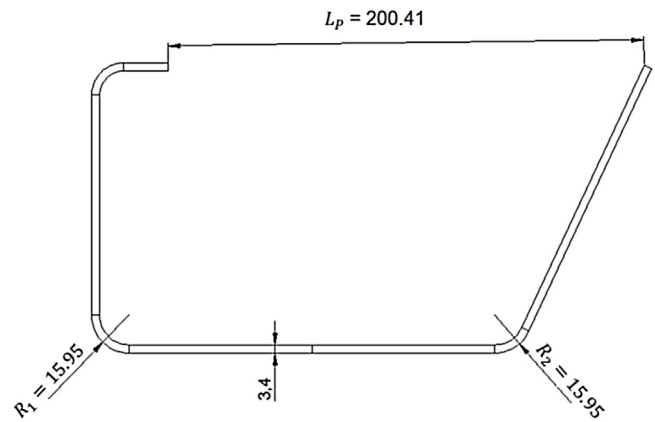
Channel section shape formed in the industrial trials. (Dimensions in mm).
